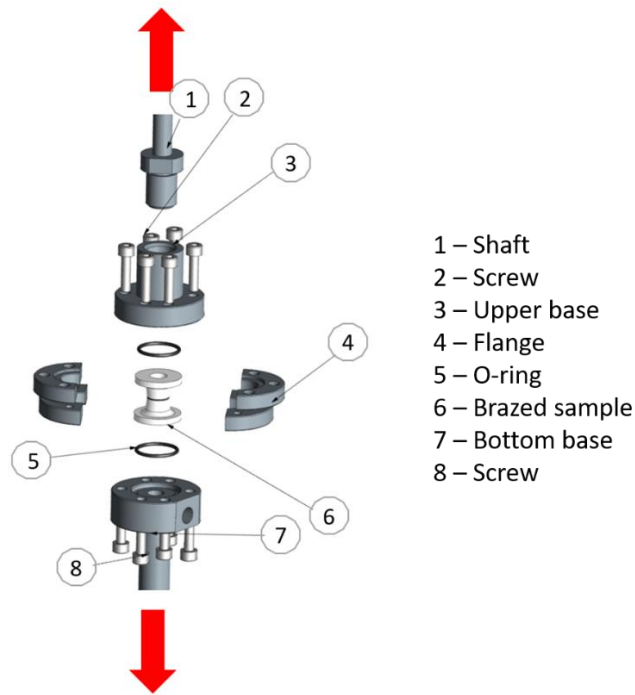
Exploded view of a brazed specimen and the tensile tool for tensile test
